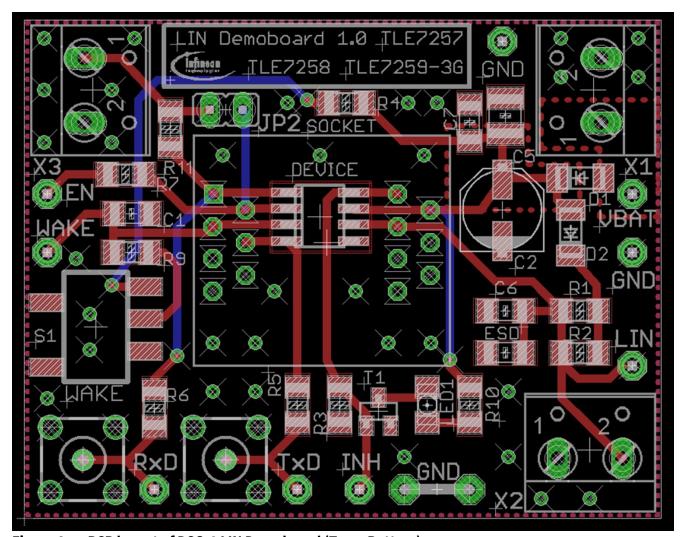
PCB layout of DSO-8 LIN Demoboard (Top + Bottom)
